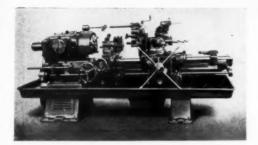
Turret lather equipped with two continuous type lubricators. One is built into each saddle.
